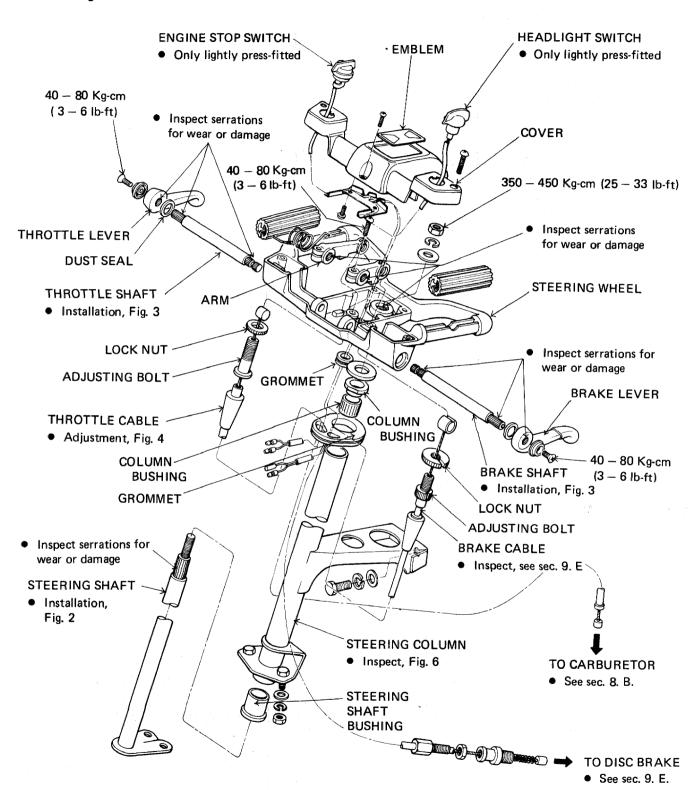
Steering Wheel and Column Disassembly/Reassembly
